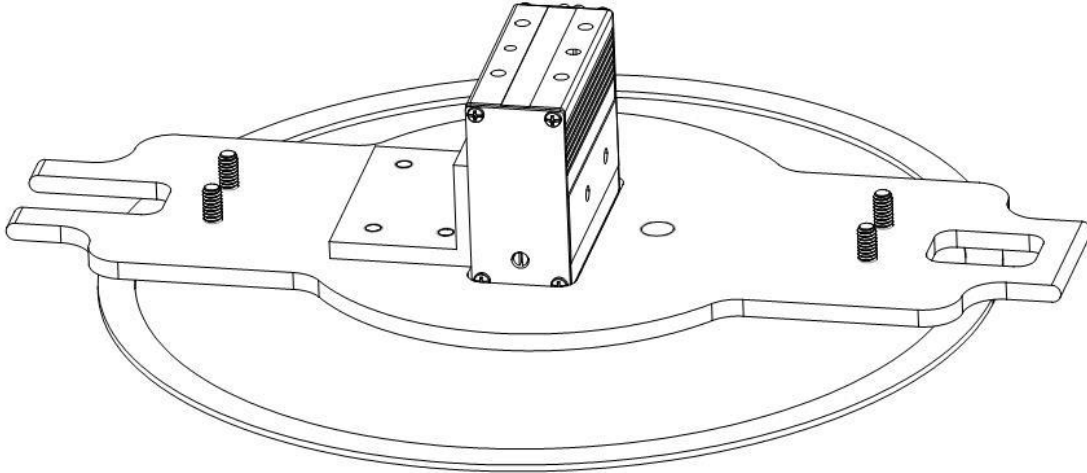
Apogee™ Mechanical Debonder Clamp Ring Mechanism
